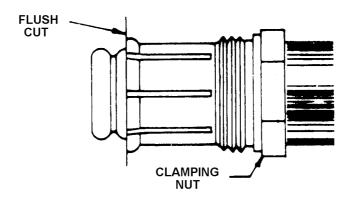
Adding the Clamping Nut and Cutting the Cable
